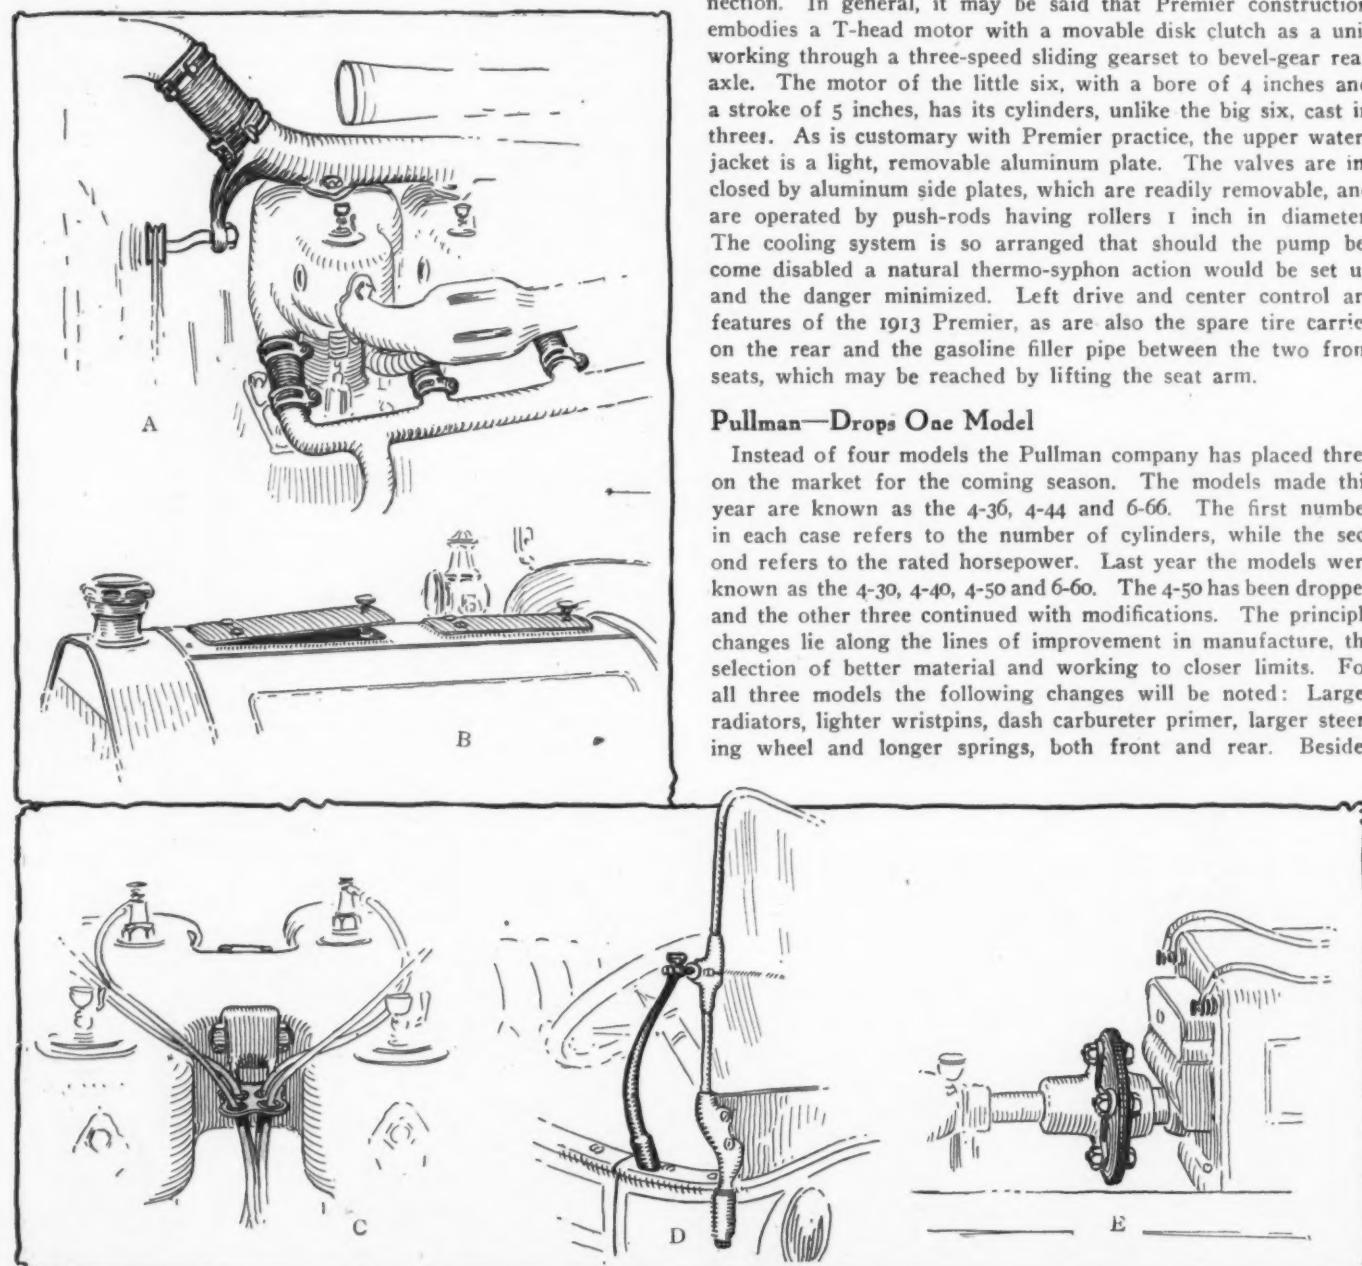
A, Maxwell rubber water manifold connections; B, Pierce hood cover plates; C, Pullman wire clip; D, Peerless windshield bracket; E, Pierce leather-disk magneto drive coupling
